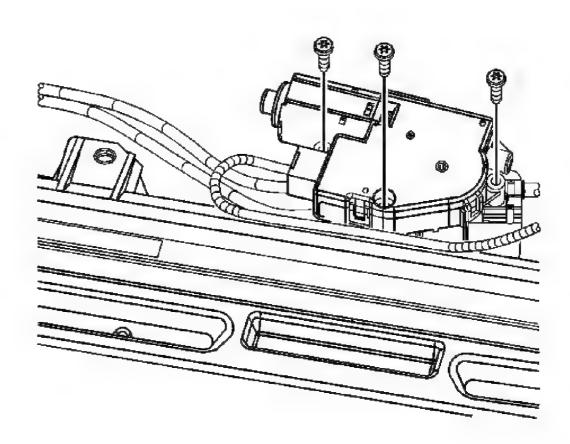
View Of Sunroof Motor/Actuator, Electrical Connector & Screws Courtesy of GENERAL MOTORS CORP.
